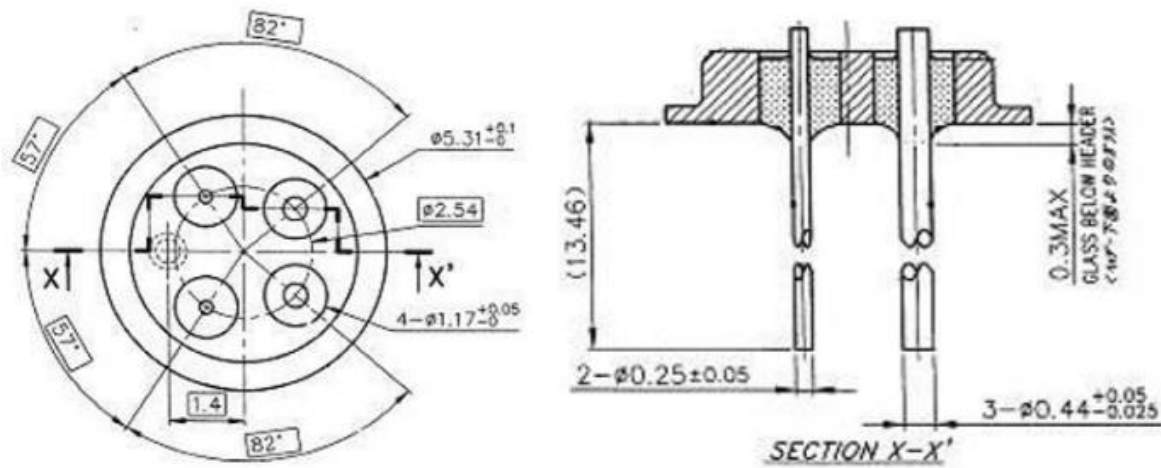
Transversal and bottom view of the VCSEL with dimensions (in mm) [35]
